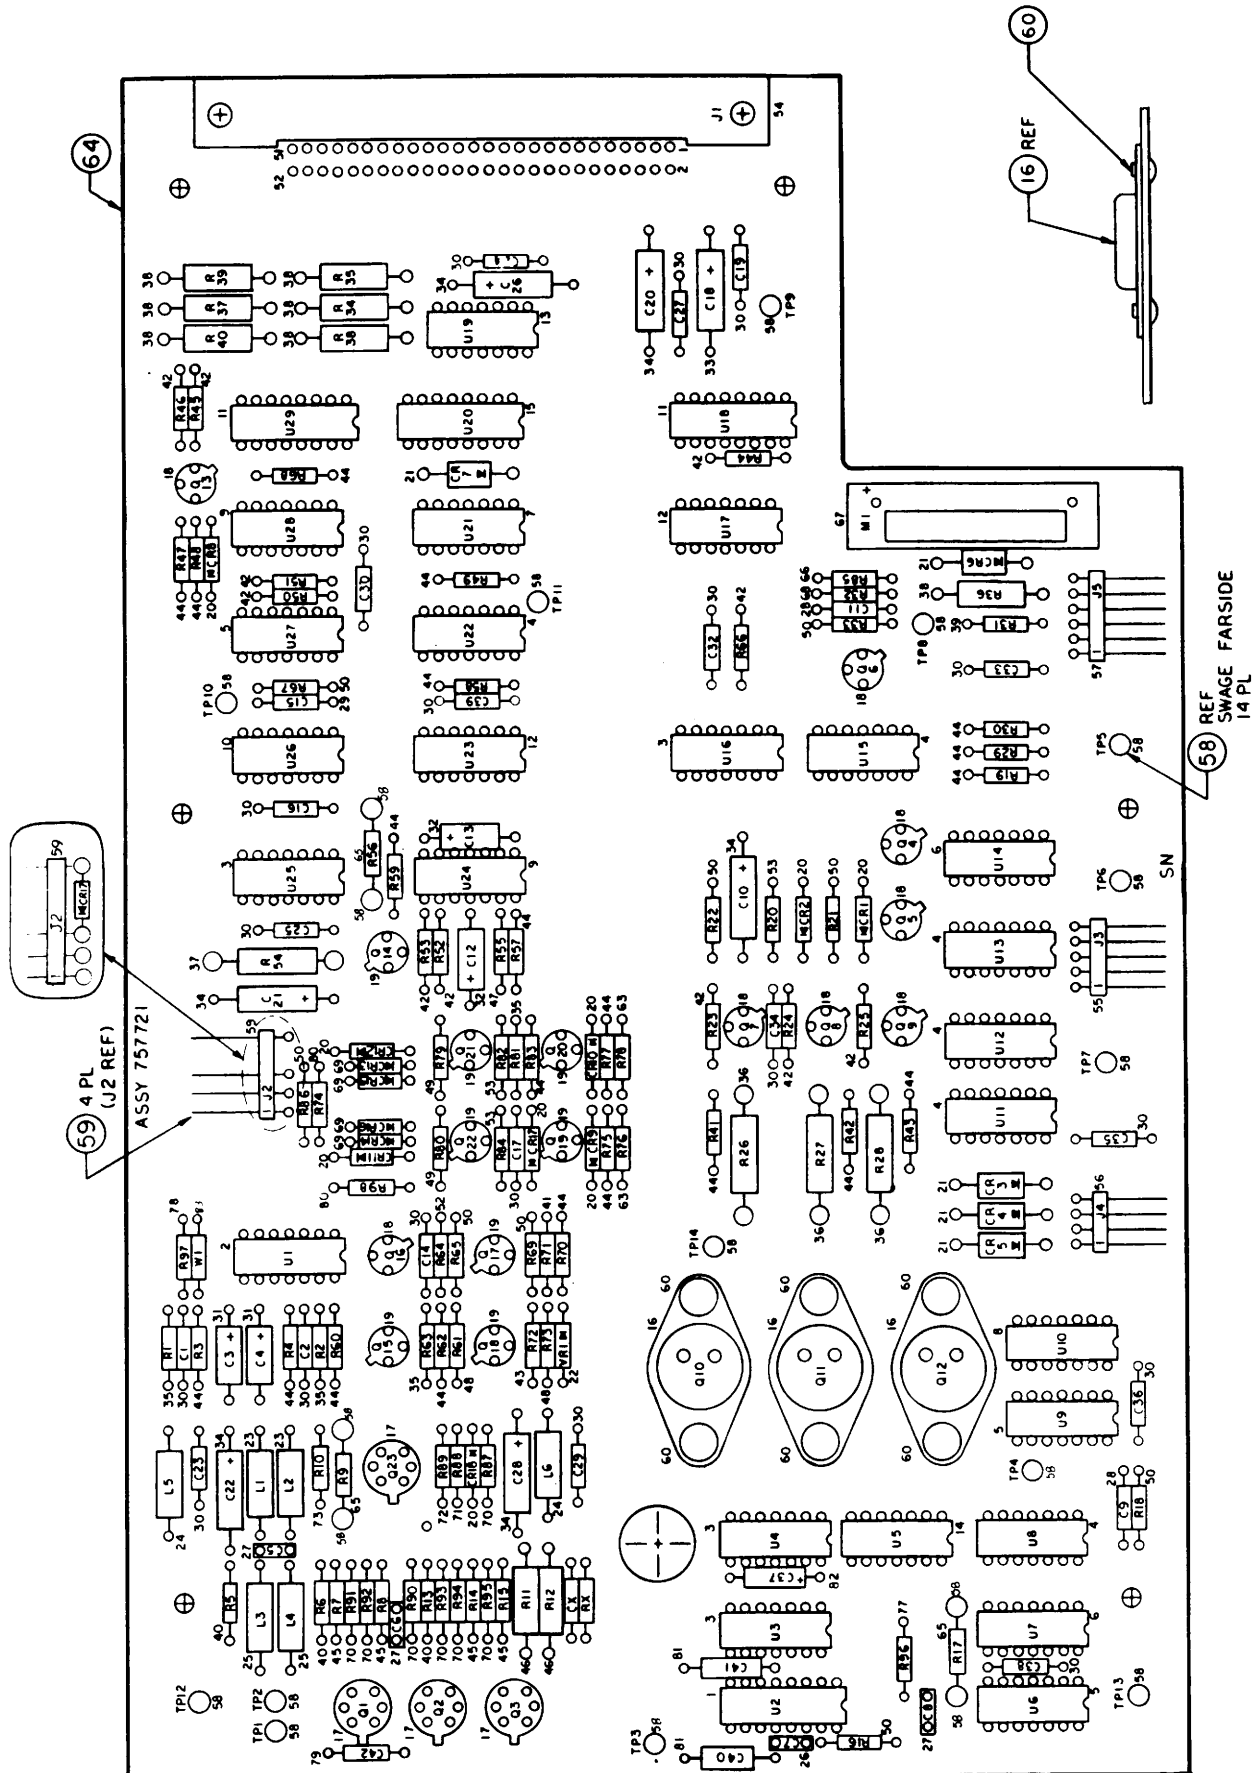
Assembly Drawing and Parts List (Sheet 1 of 3)
